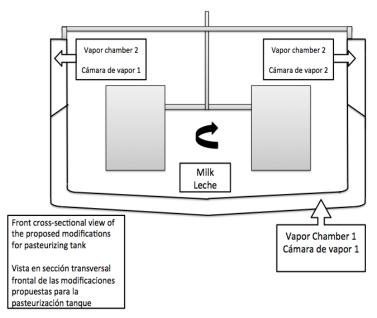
Front cross-sectional view of the proposed modifications for pasteurizing tank
